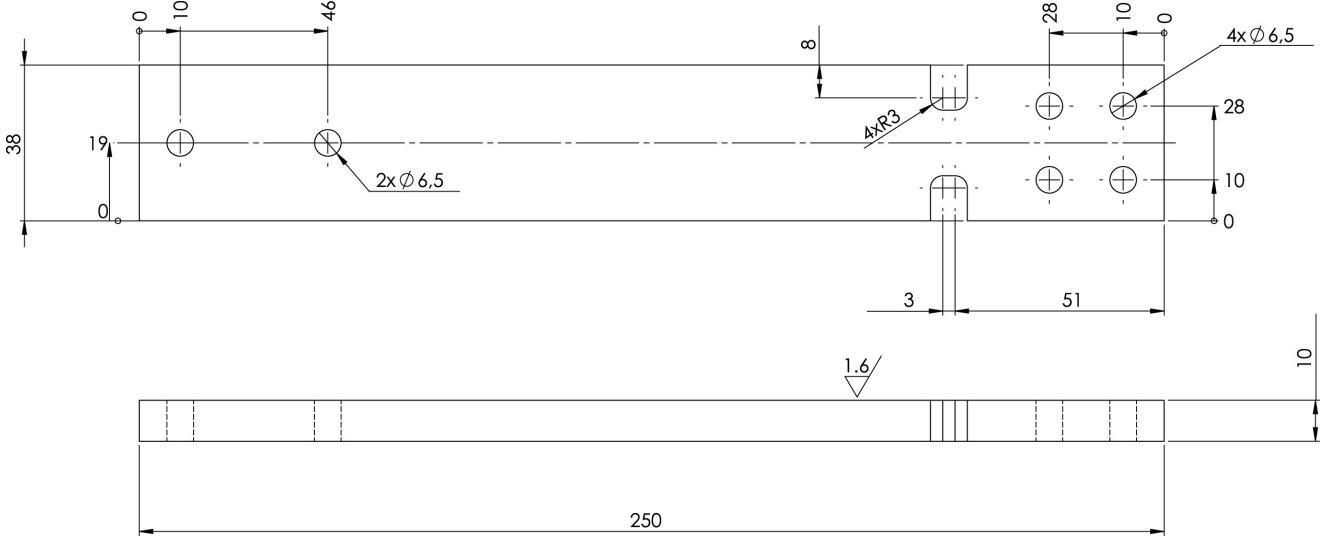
Detailed geometry of the specimen used in the testing campaign (all measures are in *mm*).
